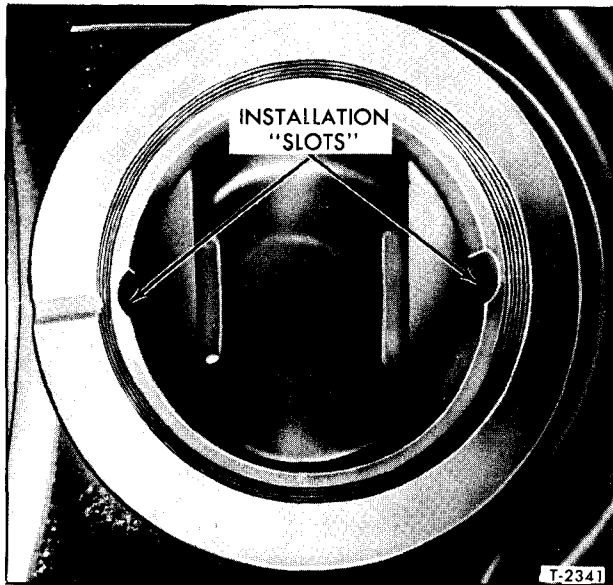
Wedge Cavity in Housing ("Slots" Shown)
